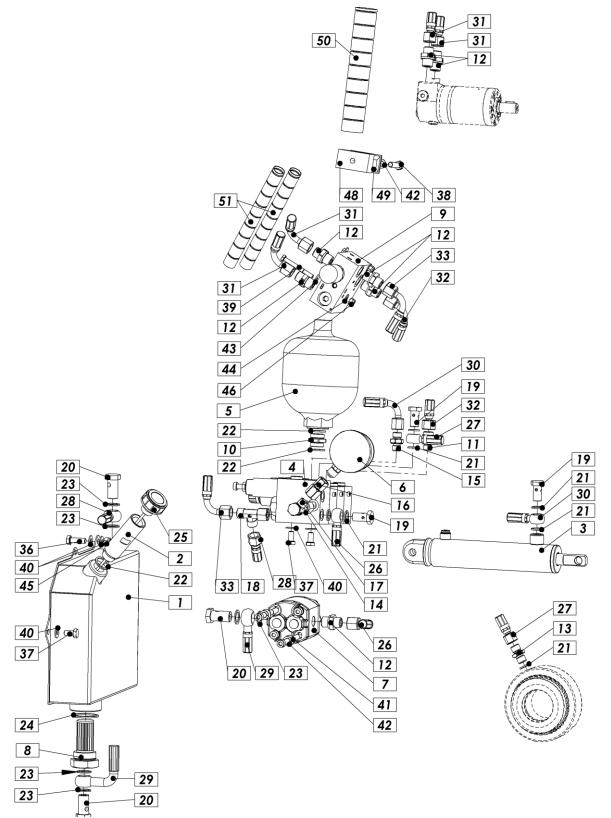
7002.32.15.0 – Hydraulic assembly 65/85Hpro
